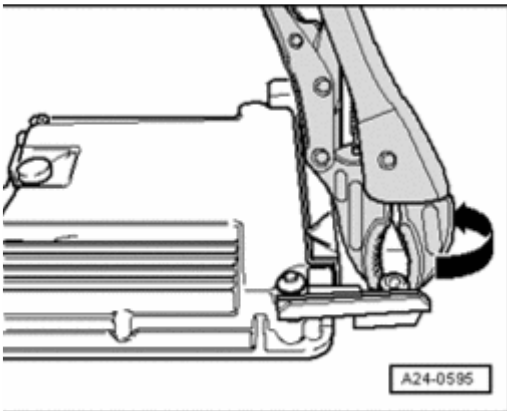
Using Locking Pliers To Remove Shear Bolt
